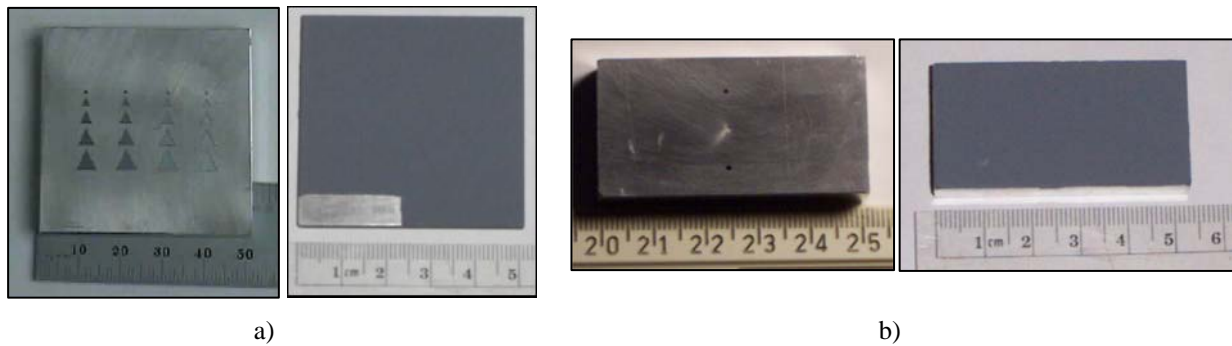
Engineered corrosion samples before- and after-paint application. a) Laser-machined triangle sample, and b) pitting corrosion sample.
